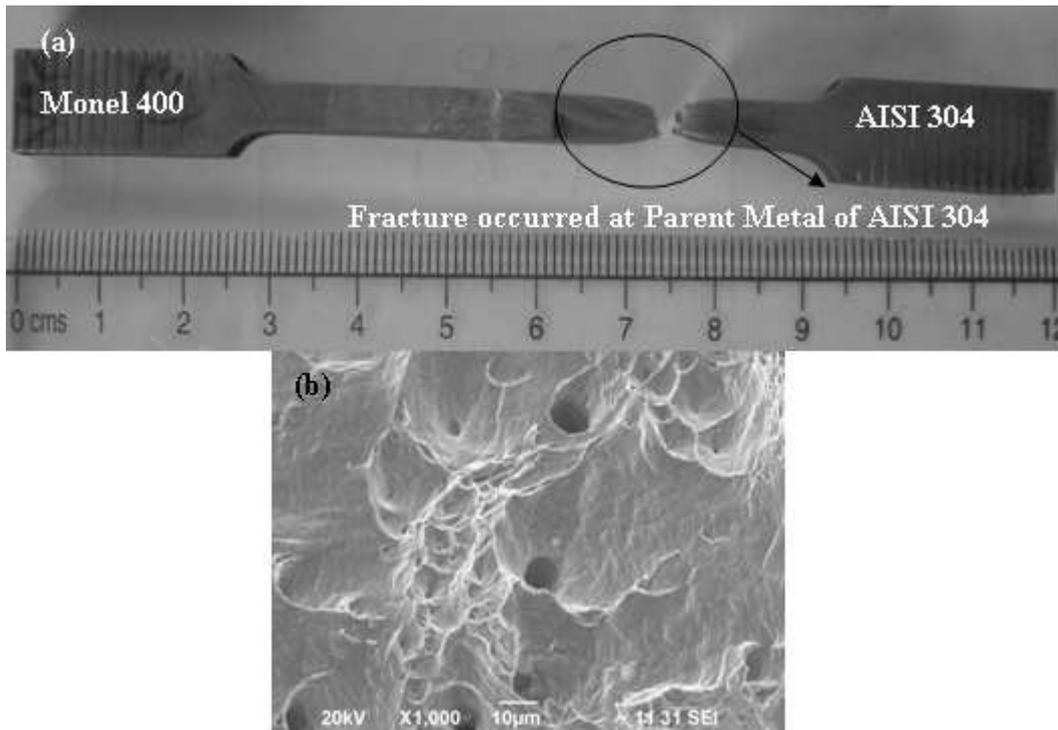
(a) Fractured tensile sample (b) SEM fractograph
